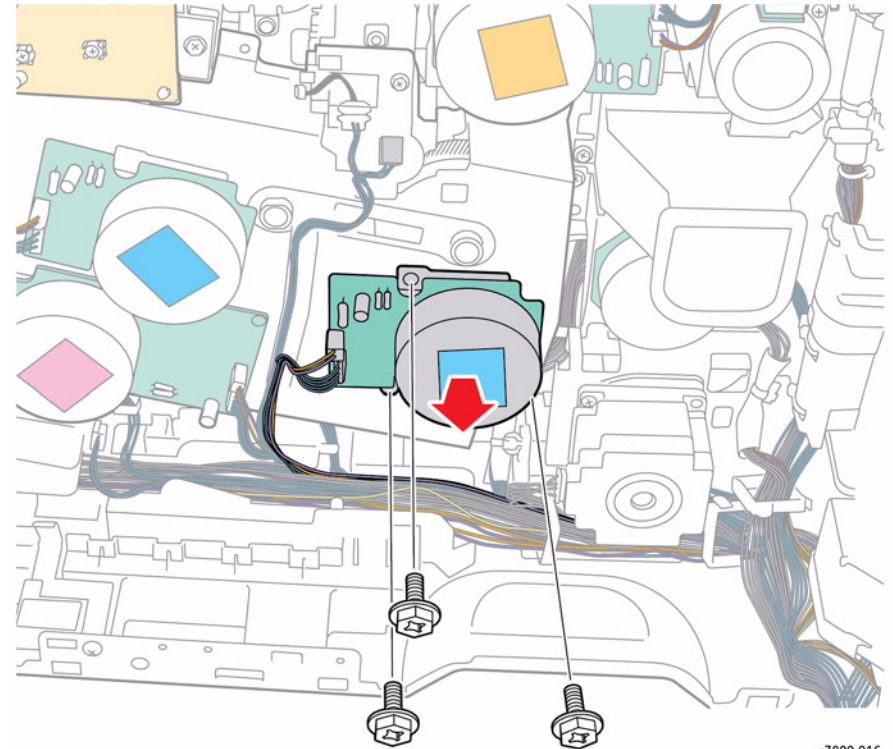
Removing the Drum/ Deve Drive Motor (K)
